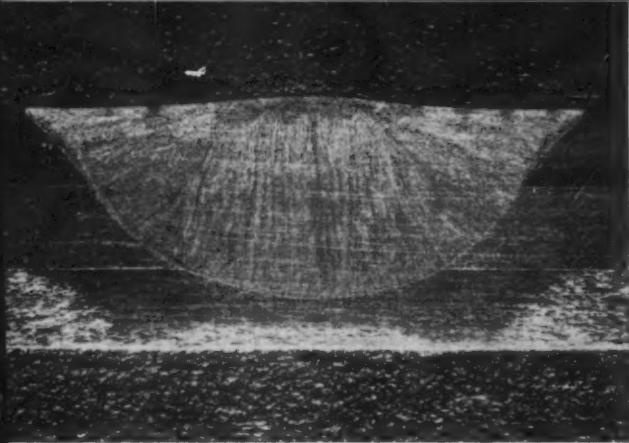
Photomicrograph of cross section through three metal sheets joined by inert-gas tungsten-arc spot welding.
